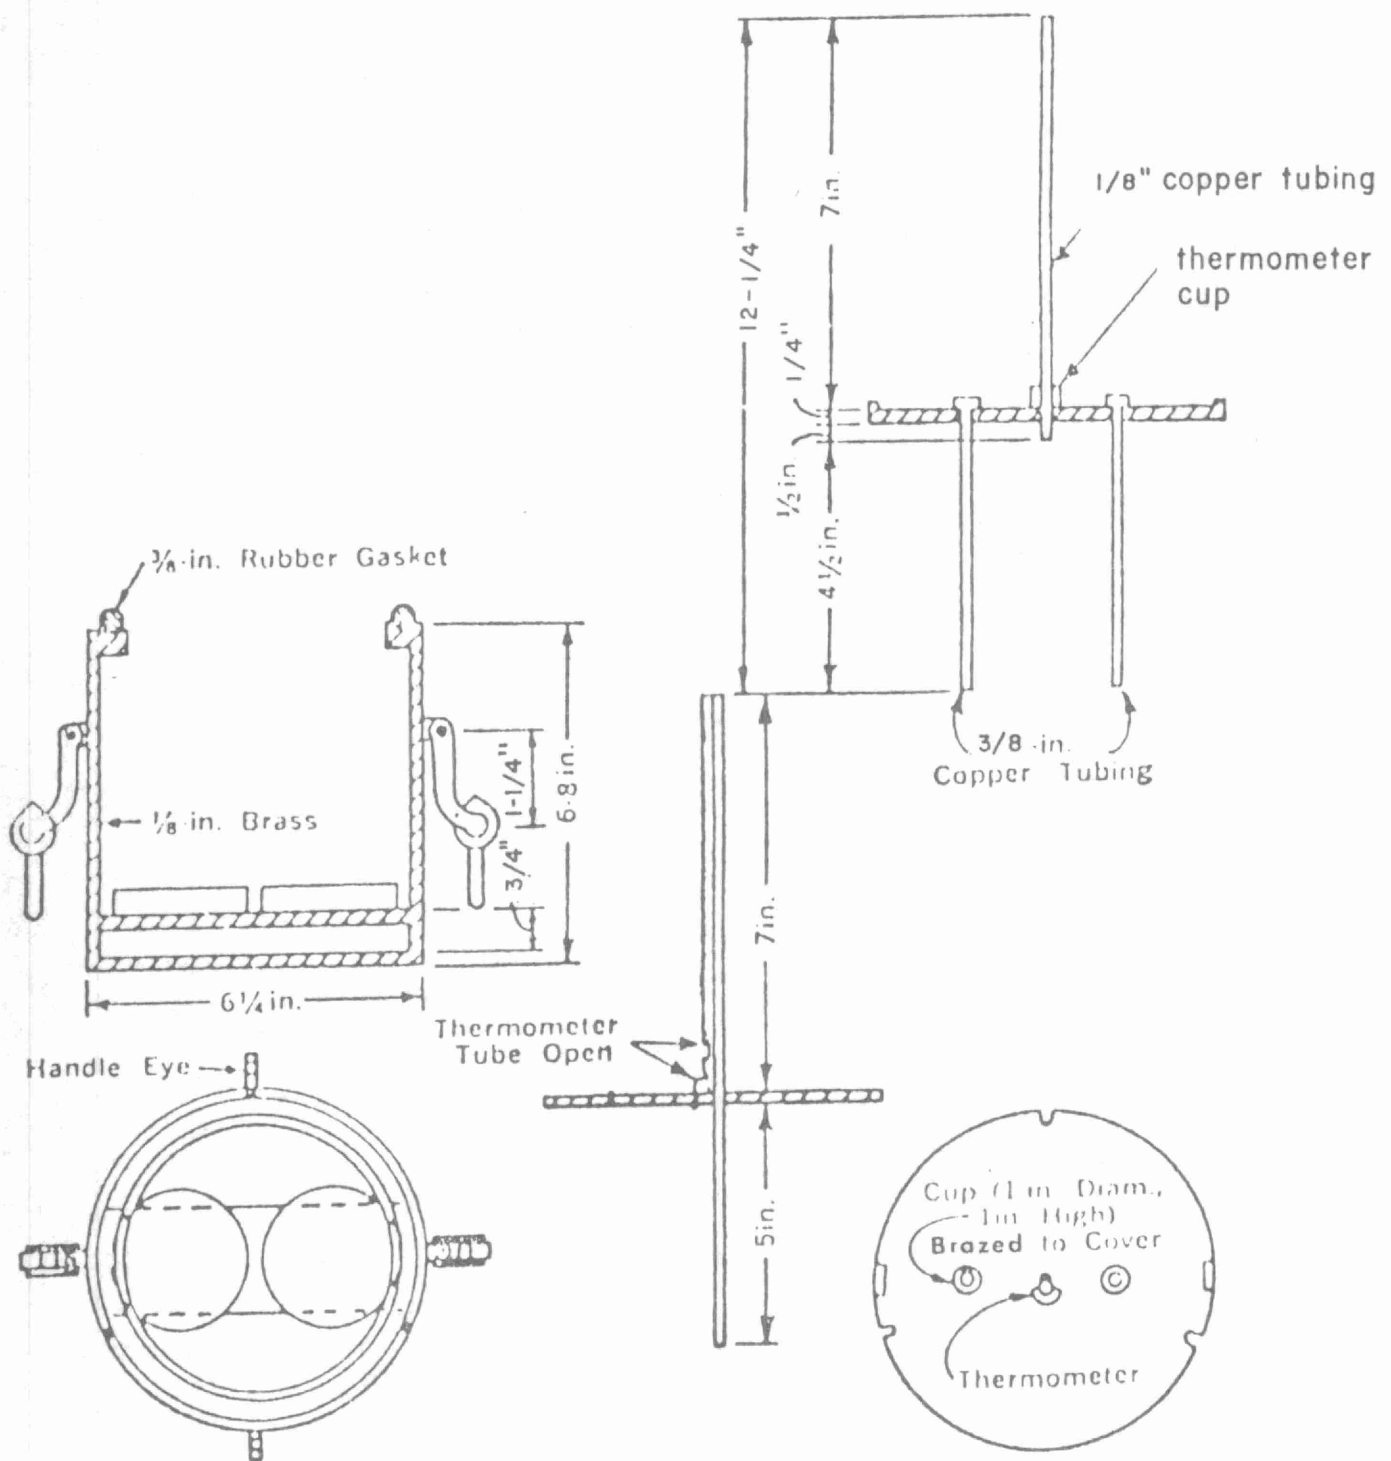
DO AND BOD SAMPLER ASSEMBLY
